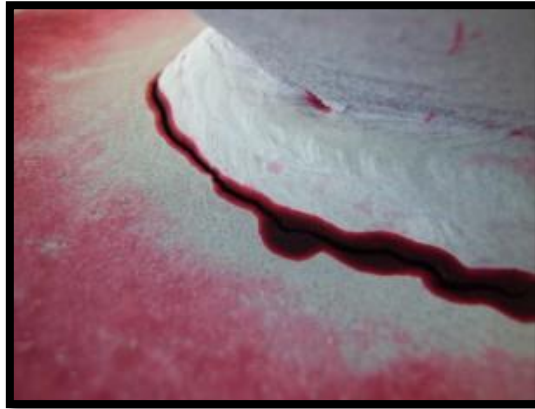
Example of the application of visual die inspect of weld joints (Larson 2002)
